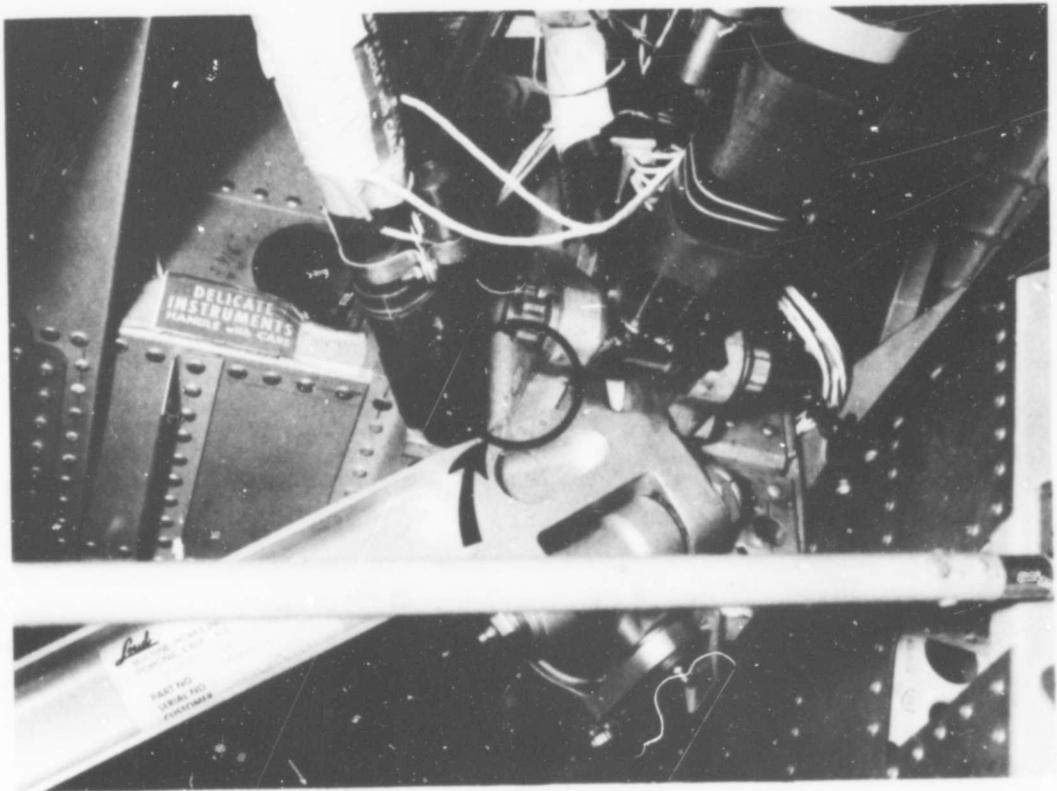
View Showing Failed Bolt on Landing Gear Brace Bracket
